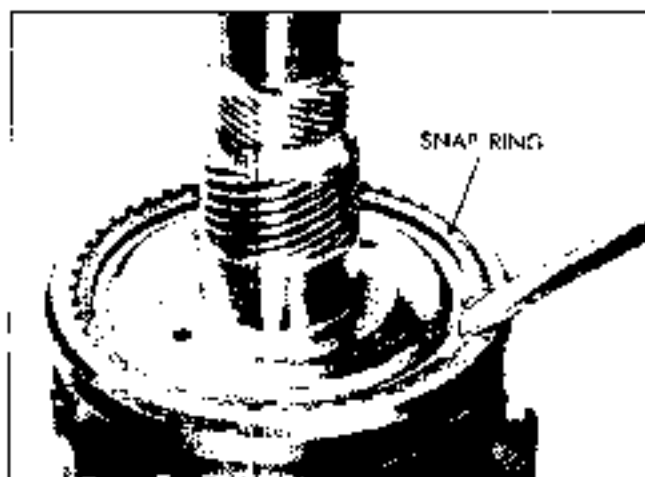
E-54 Removing Output Shaft to Carrier Snap Ring
